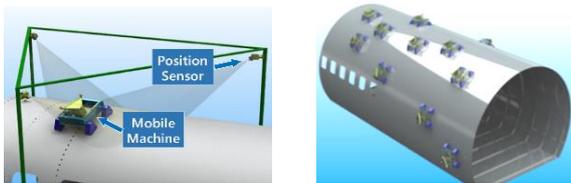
A mobile machine on machining on-site and multi-collaborative machining
